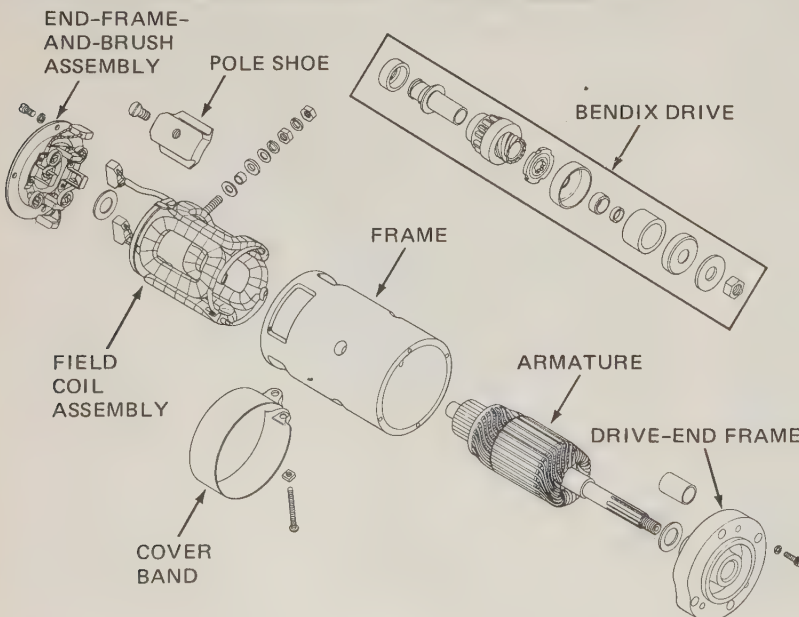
Disassembled view of an electric starter with a Bendix drive. (Kohler Company)
